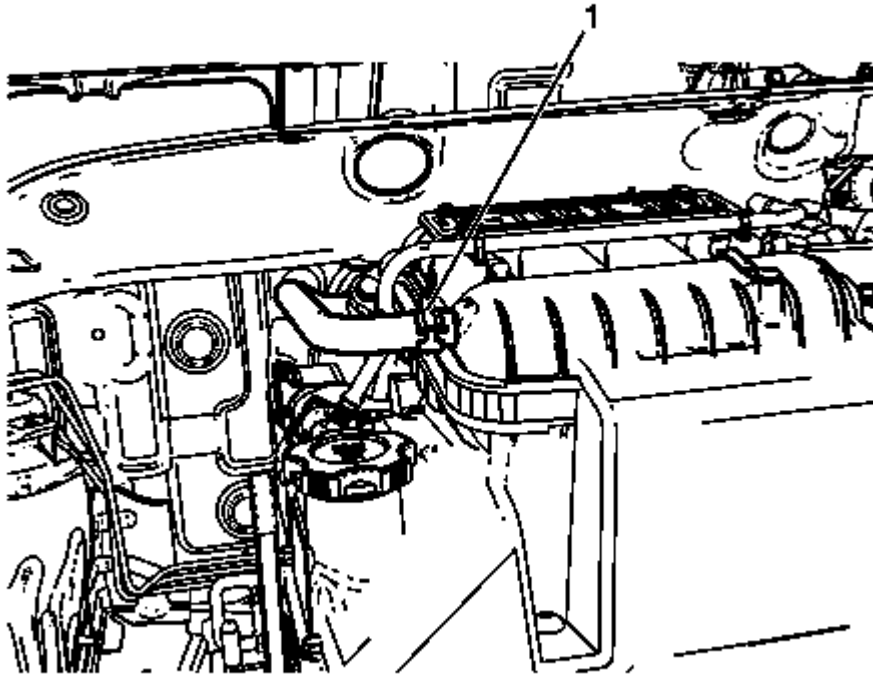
Power Brake Booster Vacuum Hose Quick Connect
